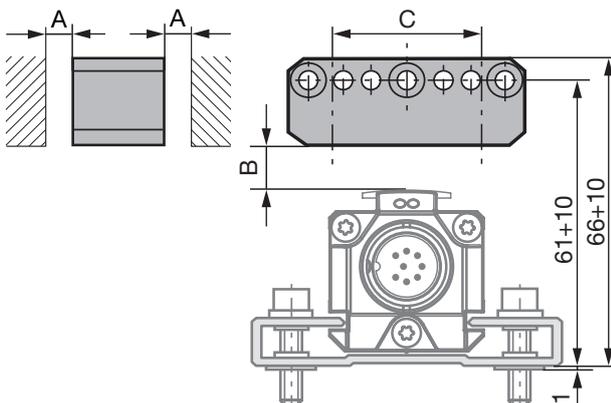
Dimensions and distances with BTL5-P-5500-2 magnet
